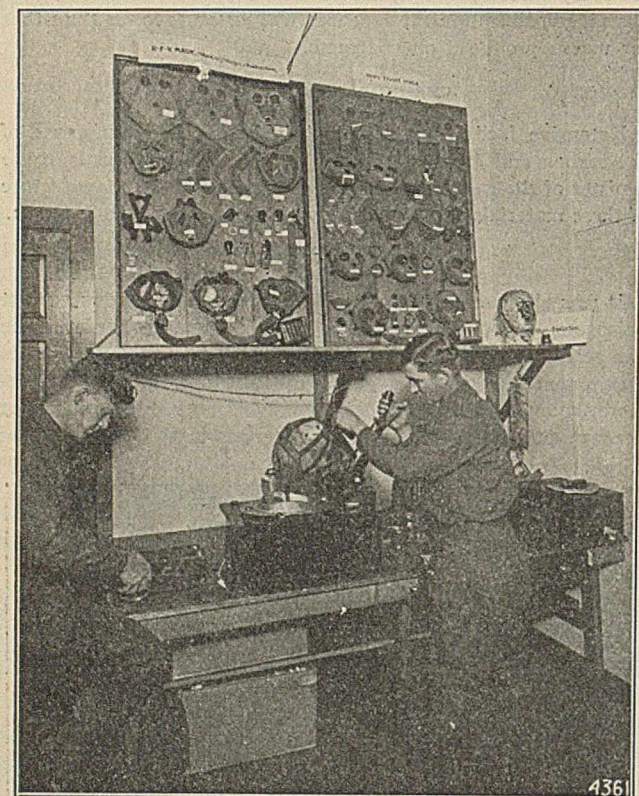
LONG ISLAND LABORATORY. MACHINE DESIGN UNIT SHOWING DEVICE FOR TESTING COMPLETED MASKS FOR LEAKAGE
